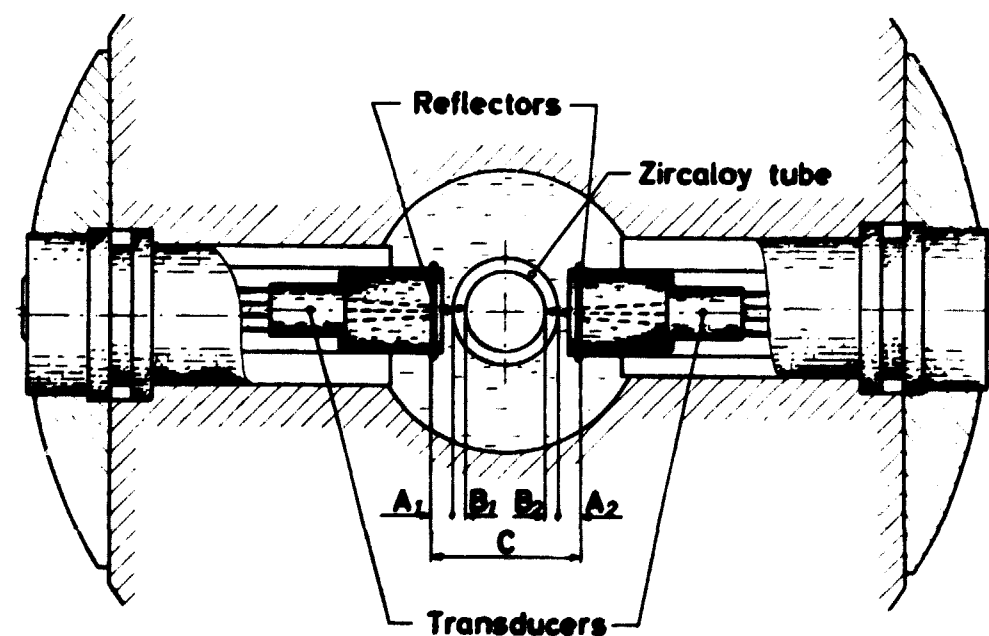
Principle of dimension measurement. The measurement is performed in the water-filled central part of the rotating chamber.
